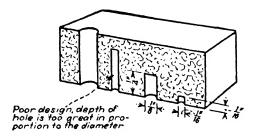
Holes are easier to mold if they go all the way through a molded piece. Core pins for through holes can be piloted into and be supported by holes in either half of the die. Holes not going all the way through should be limited to a depth of twice the diameter. Small holes 1/16 in. or less in diameter should not be deeper than the diameter.
